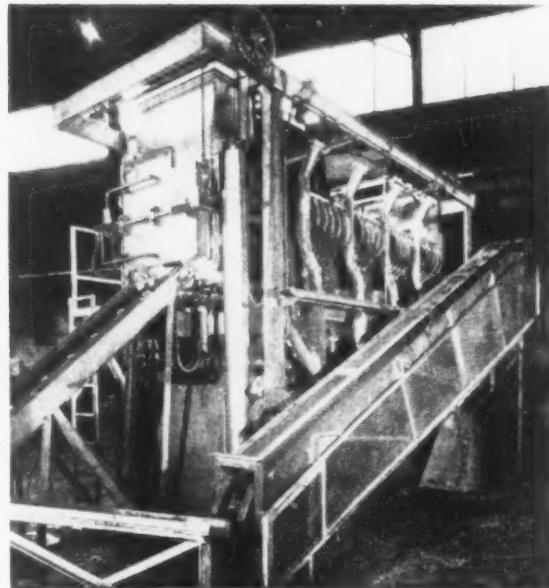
Barrel type high speed gas furnace with automatic conveyor system for charging and discharging ring gear billets. One operator loads billets, feeds presses.
